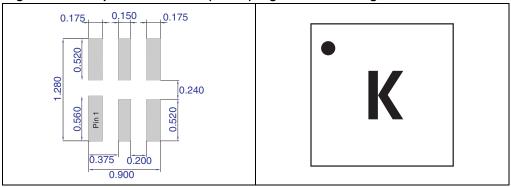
Footprint dimensions (in mm) Figure 15. Marking
